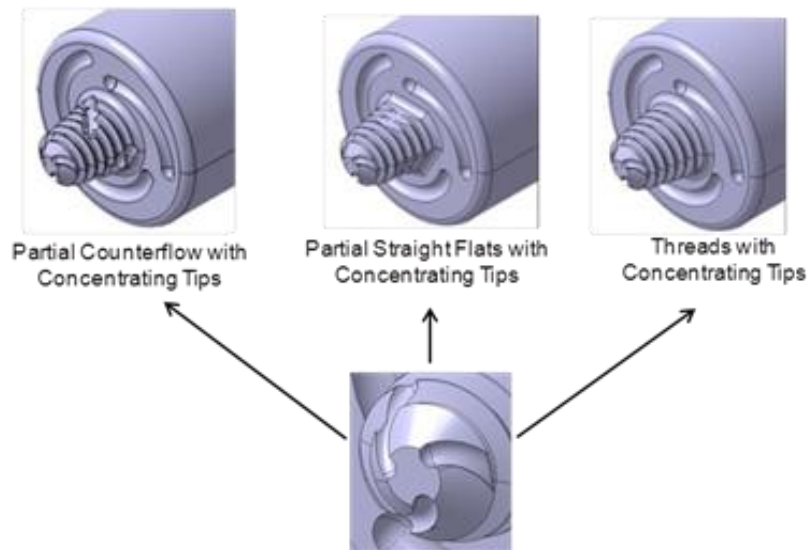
New weld tool design modification with concentrating tip.
